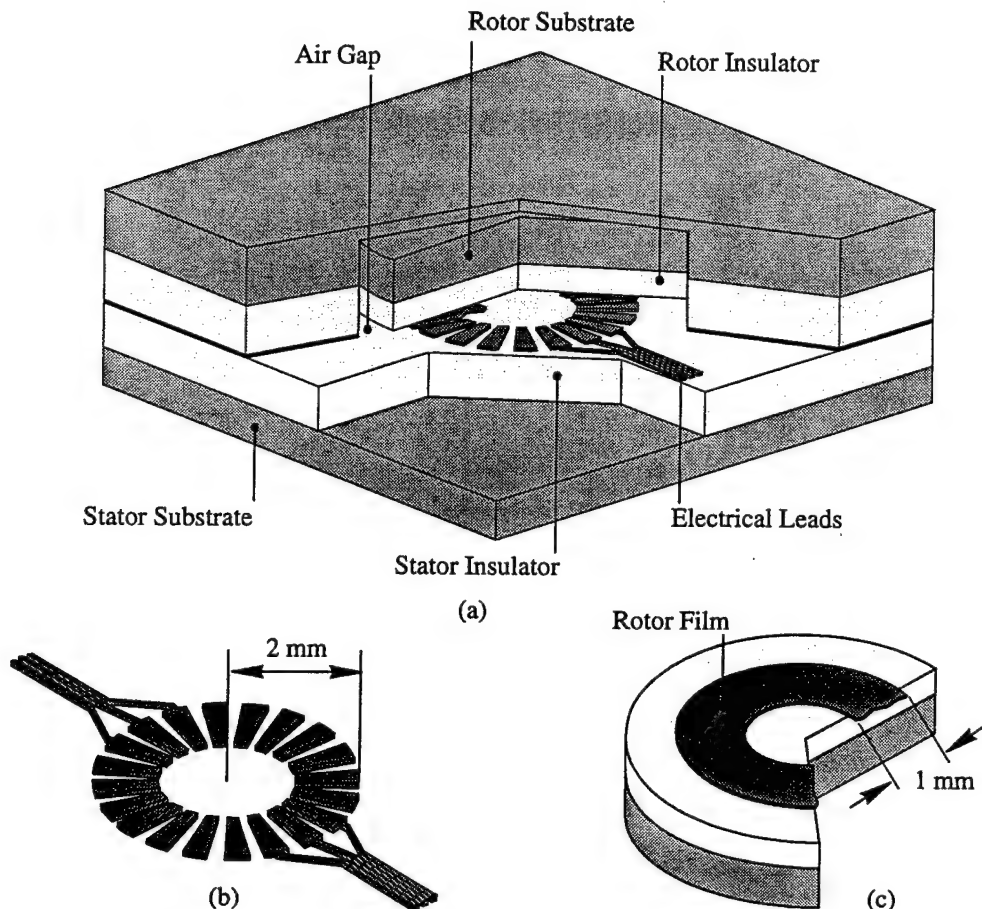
A simplified three-dimensional model of a micro-scale electric induction machine showing (a) an assembled device, (b) the stator electrodes, and (c) the rotor disk, turned over to show the slightly conducting rotor film. This picture shows only features relevant to the electromechanical design; for example, turbine/compressor blades or tethers are removed. Also, the material thicknesses are not to scale and the actual device would have many more stator electrodes than shown in part (b).
